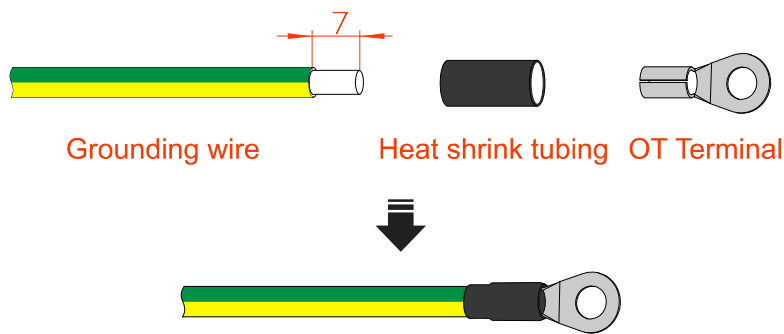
Stripping diagram of external grounding wire (unit: mm)
